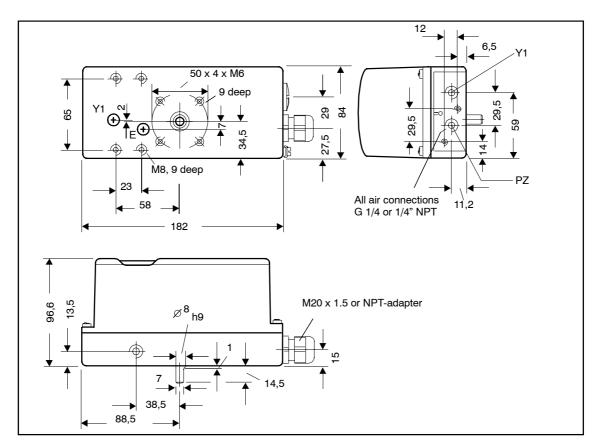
Dimensional drawing version metal housing 6DR5xx1
